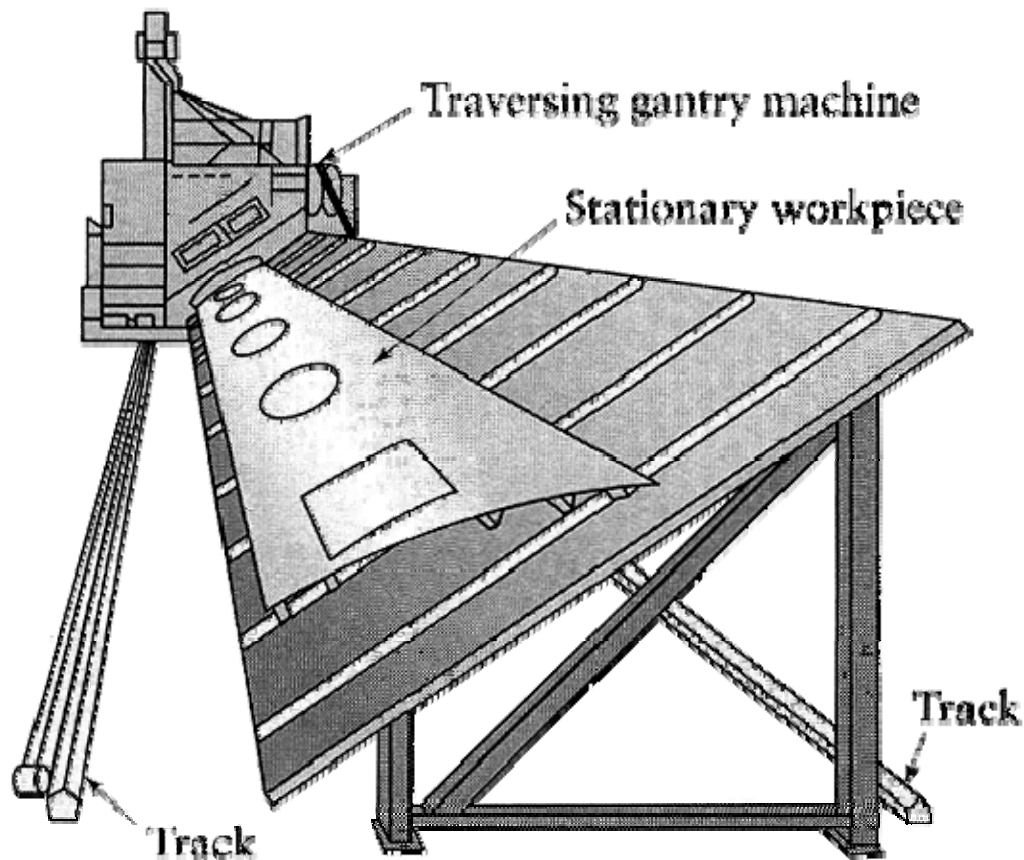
Peen-forming machine to form a large sheet-metal part, such as an aircraft-skin panel. The sheet is stationary, and the machine traverses it. Source: Metal Improvement Company.
